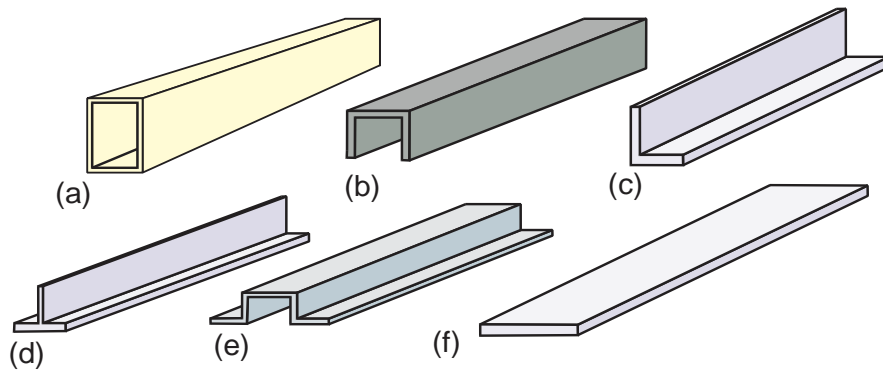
Cross-sectional shapes for manufacturing using the ASU cement composite pultrusion equipment: a) closed cell, b) C channel, c) equal leg angle, d) T-section, e) hat section, f) flat board
